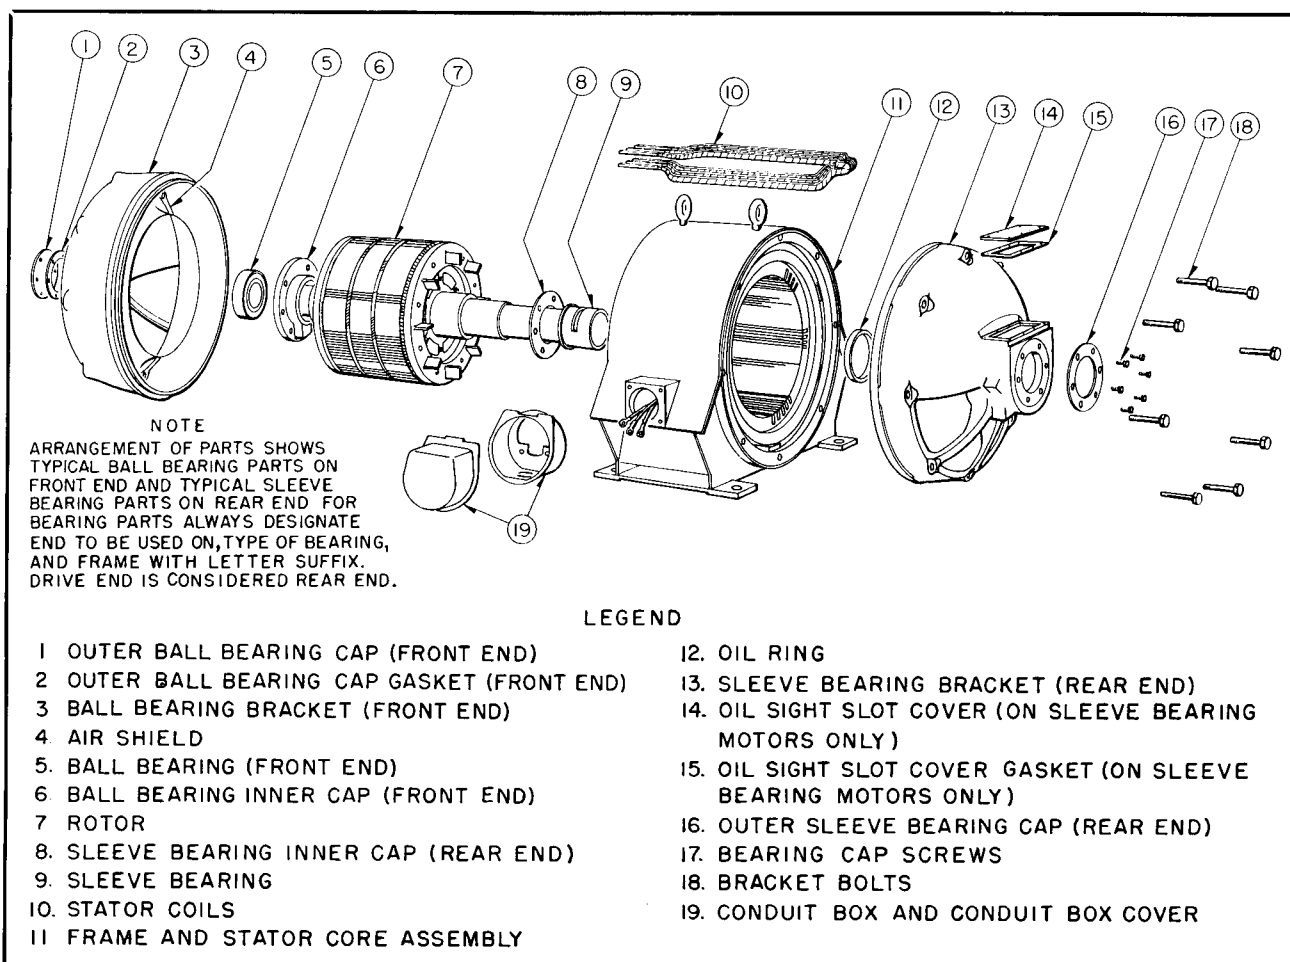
Arrangement of Parts—Drip-Proof Type CSP Motor (Frames 580-683)
